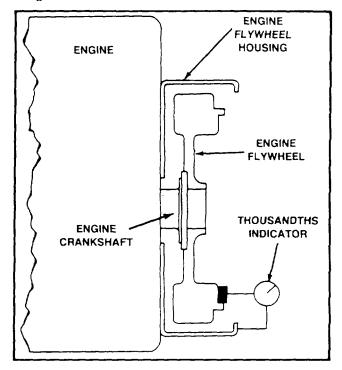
Checking the Face of the Engine Flywheel Housing
